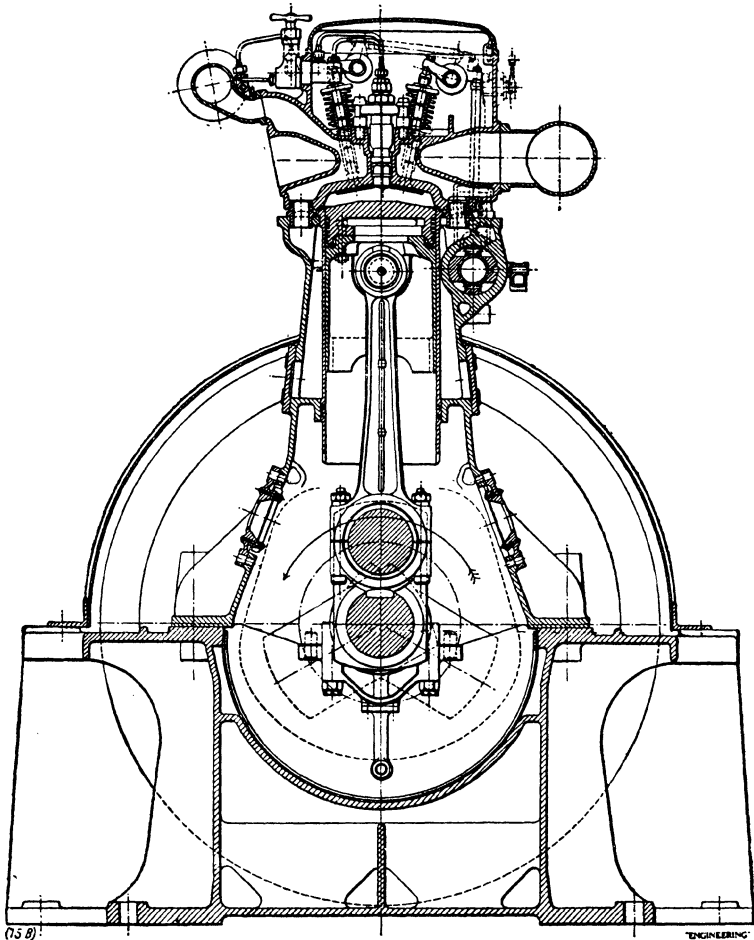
Beardmore High-speed Airless-injection Heavy-oil Engine
